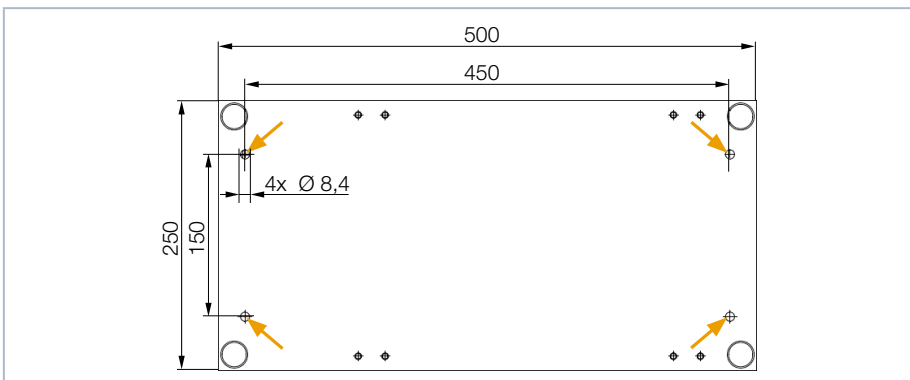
Four through holes  $\varnothing 8.4$  mm (view from below)
